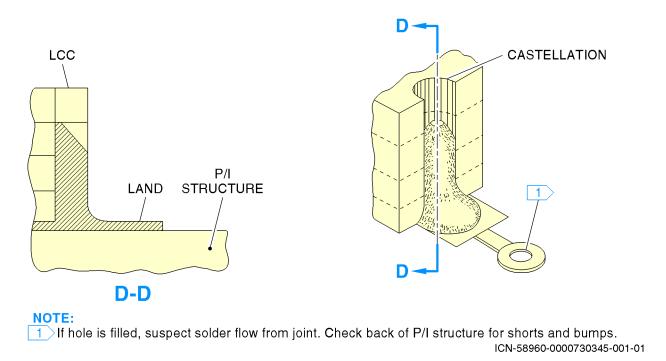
Unacceptable (Insufficient Solder) SMT LCC Solder Joint
